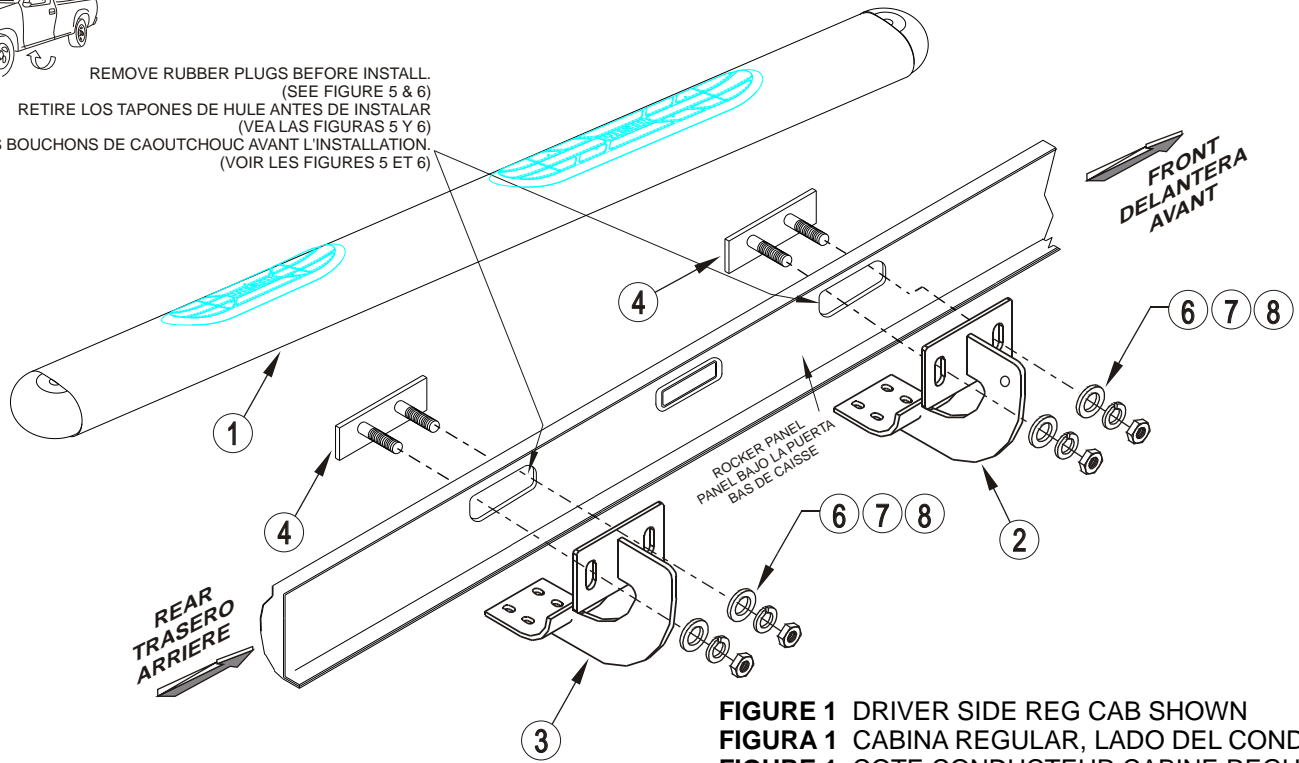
DRIVER SIDE REG CAB SHOWN
